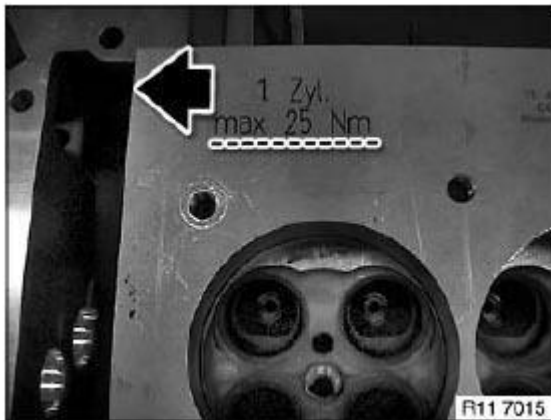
Identifying Special Tool 11 4 345 On Engine Cylinder
